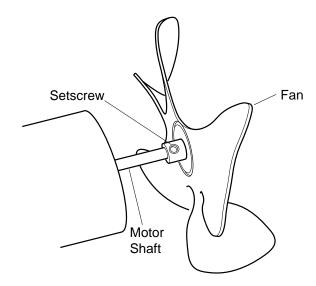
Fan, Motor Shaft, and Setscrew Location
